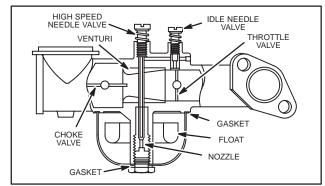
SMALL ONE-PIECE FLO-JET CARBURETOR
